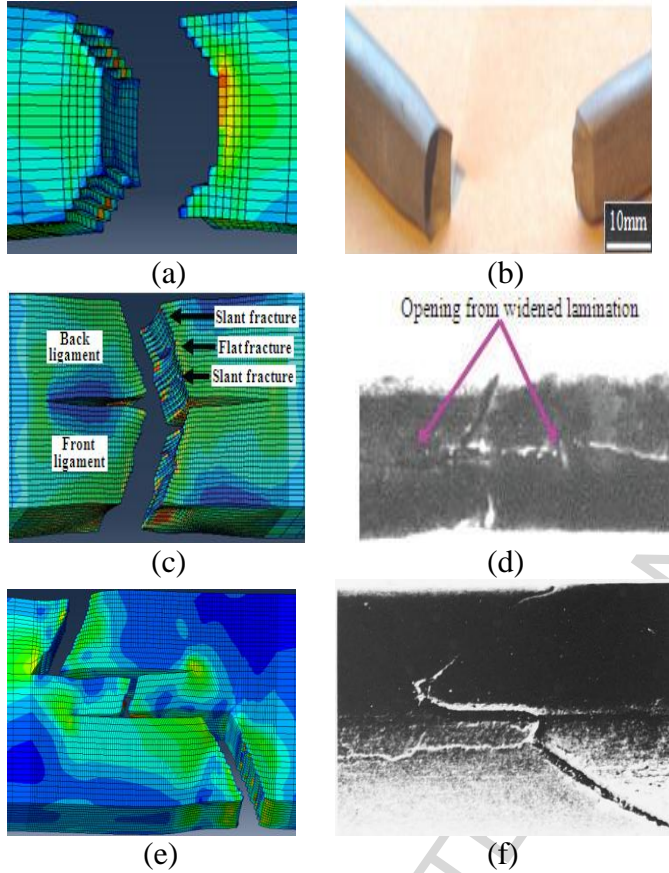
Experimental and FE predicted fracture shapes: (a) FE predicted fractured lamination-free wire (b) Experimental fractured lamination-free wire; (c) FE predicted fractured wire with single straight-end crack-like lamination (d) Experimental fractured wire with single straight-end crack-like lamination; (e) FE predicted fractured wire with double inclined-end crack-like laminations; (f) Experimental fractured wire with double inclined-end crack-like laminations.
